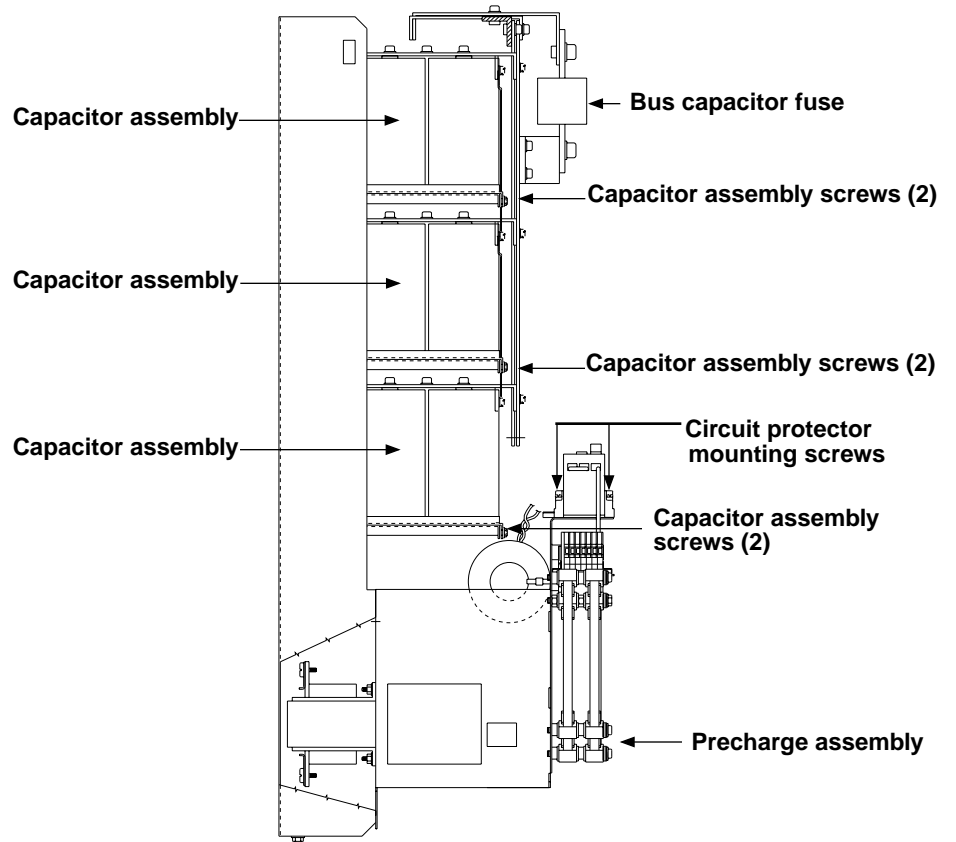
Capacitor Assembly Mounting Diagram—Side View
